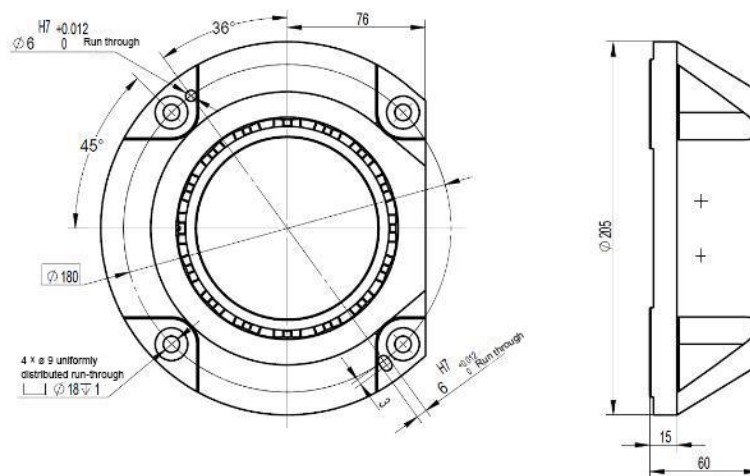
Robot base mounting holes fixed with M8 bolts (in mm)
